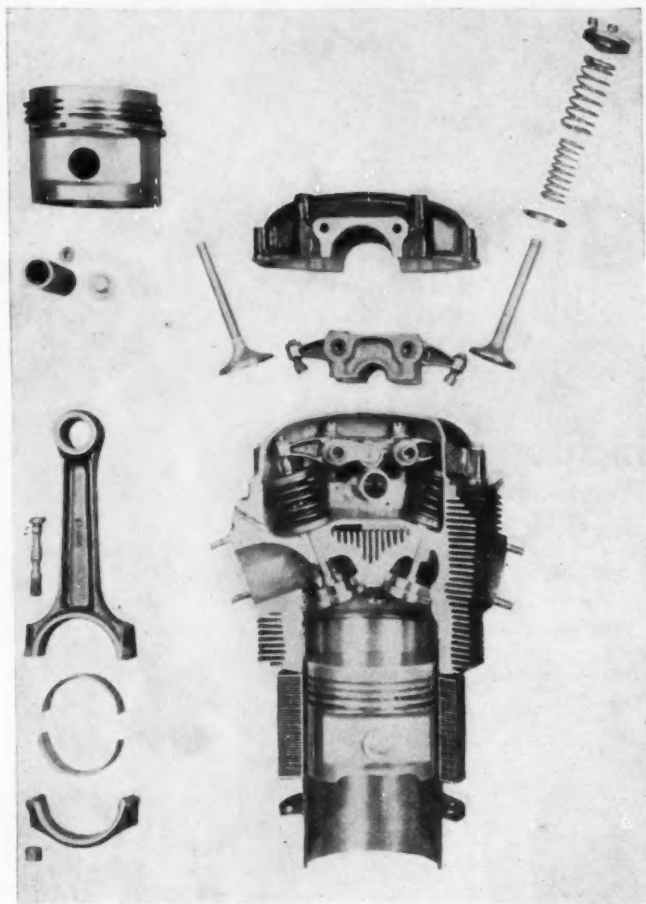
Larger (149-cu-in. displacement) cylinder and interchangeable parts
